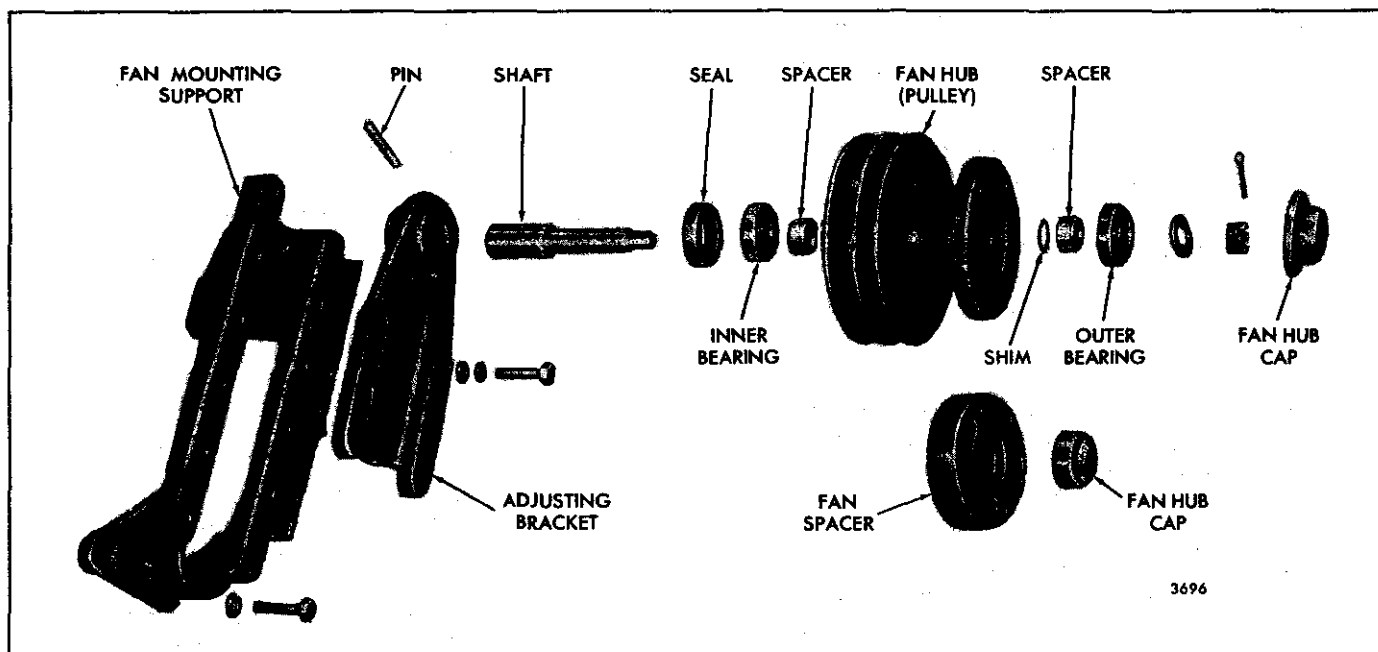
Typical Fan Hub, Shaft and Adjusting Bracket Details and Relative Location of Parts (6V Engine)
